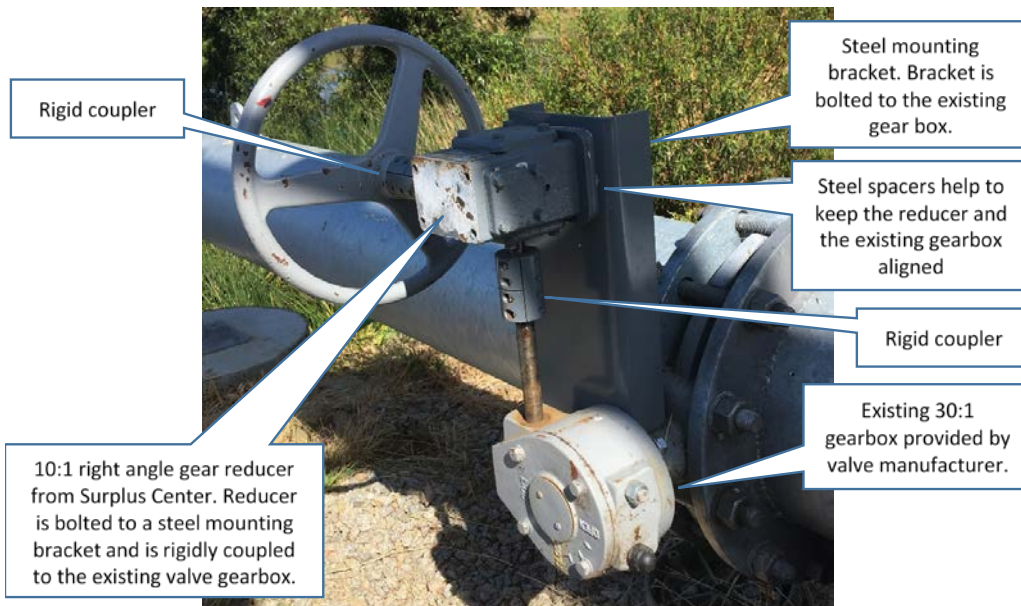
Additional gear reducer attached to a 12" Grayline butterfly valve
